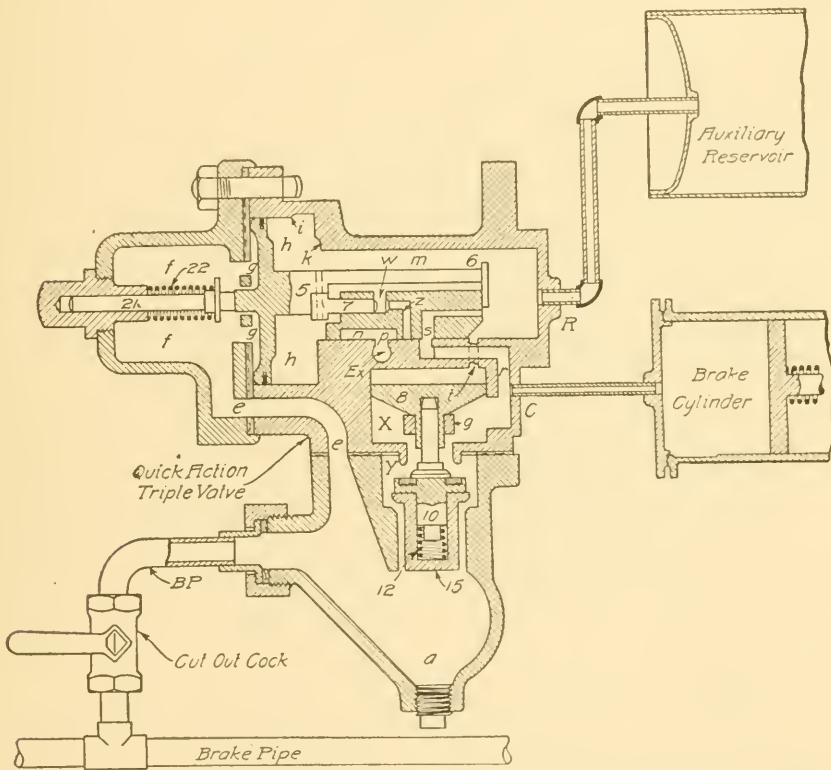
Westinghouse Quick-Action Triple Valve, Showing Emergency Position
